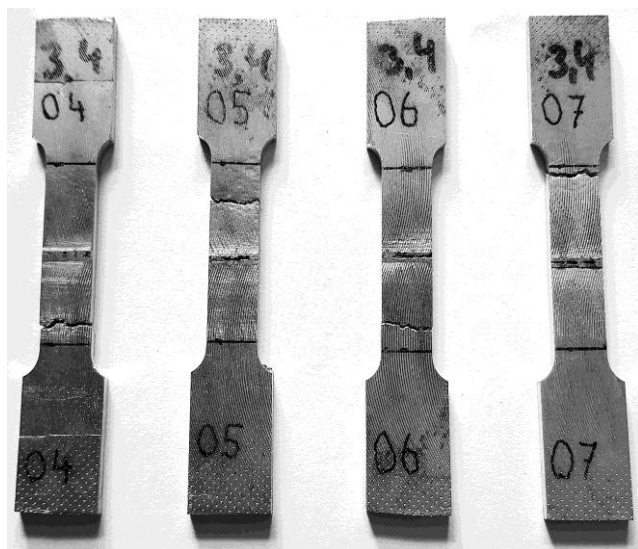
Laser welded AZ91 alloy specimens after the tensile test
